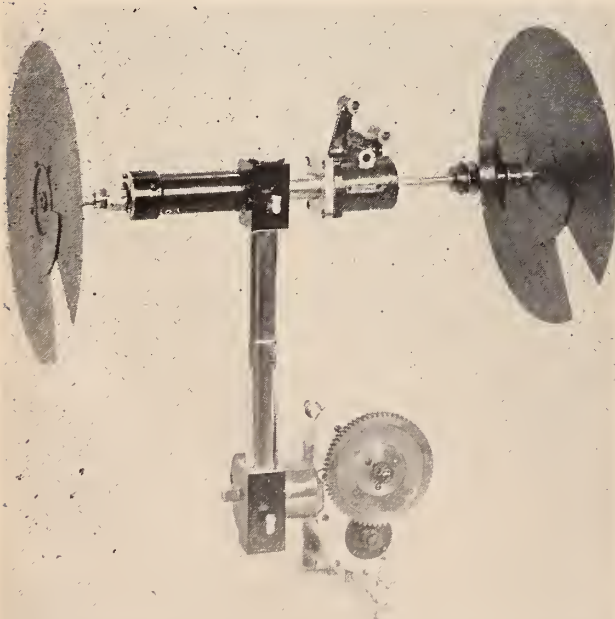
Skeleton assembly view of shutter-shaft driving system for GE television projector
